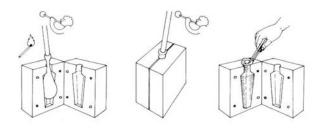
Mold-blowing technique The vessel is formed by blowing into a concave or a specially shaped mold; the vessel is completed with the free-blowing of its rim and the attachment of handles
